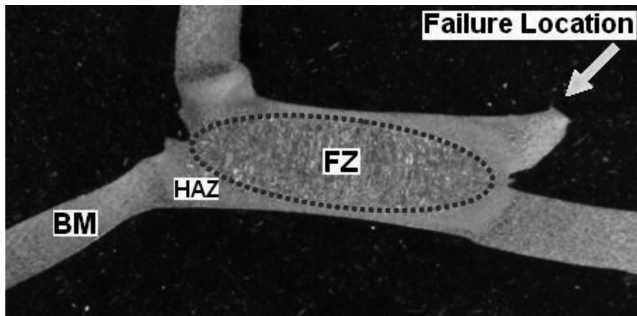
Cross sections of fracture surfaces of spot welds in tensile-shear test: One leg of the lower sheet and one leg of the upper are subjected to tensile stress. Failure is initiated from one of these legs
